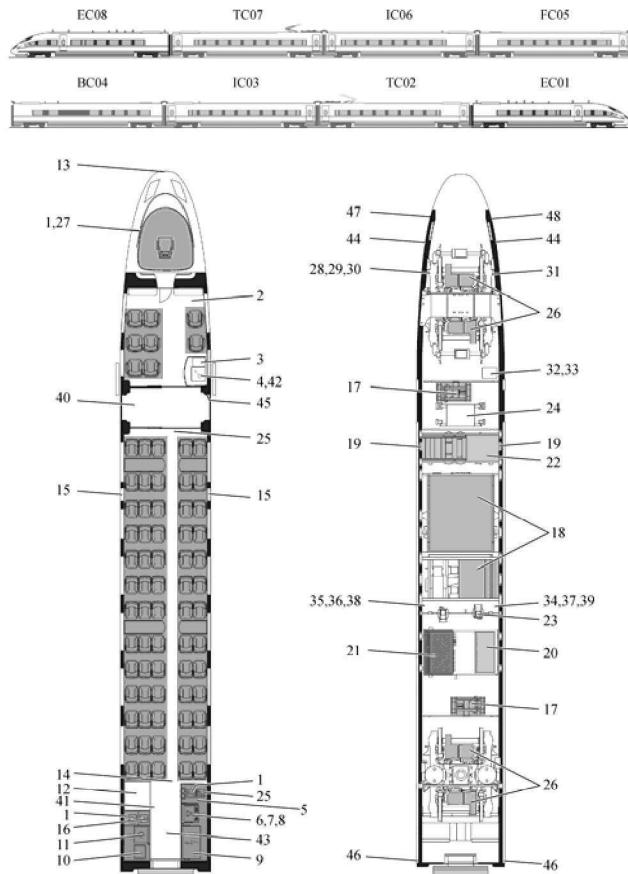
Interior and Underfloor Layout EC01 / EC08 Cars
